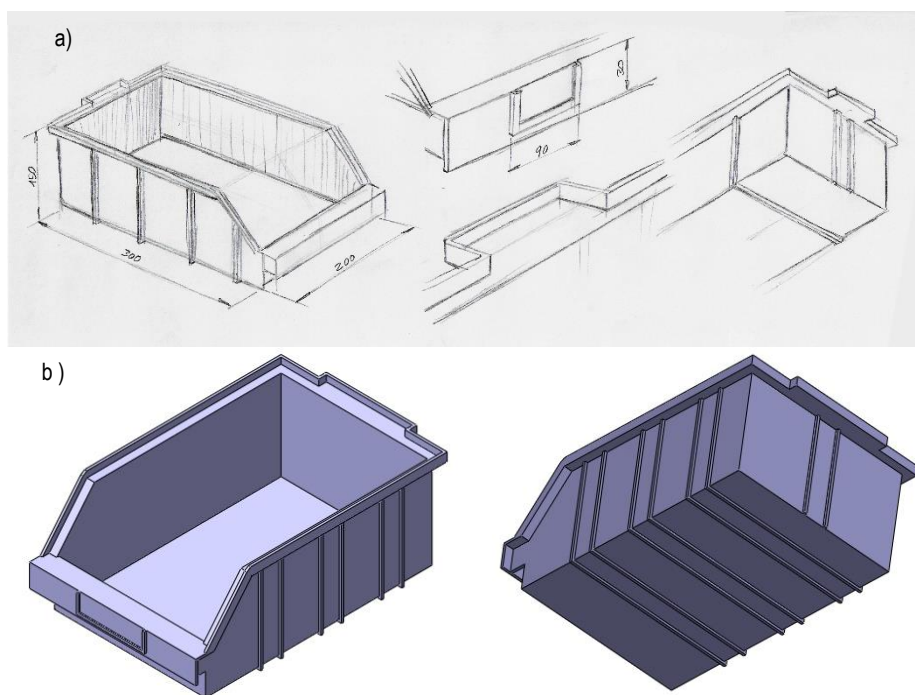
a) Initial sketch phase of the drawer (all dimensions in millimeters), b) final proposal for a 3D model drawer (Source: own work)
